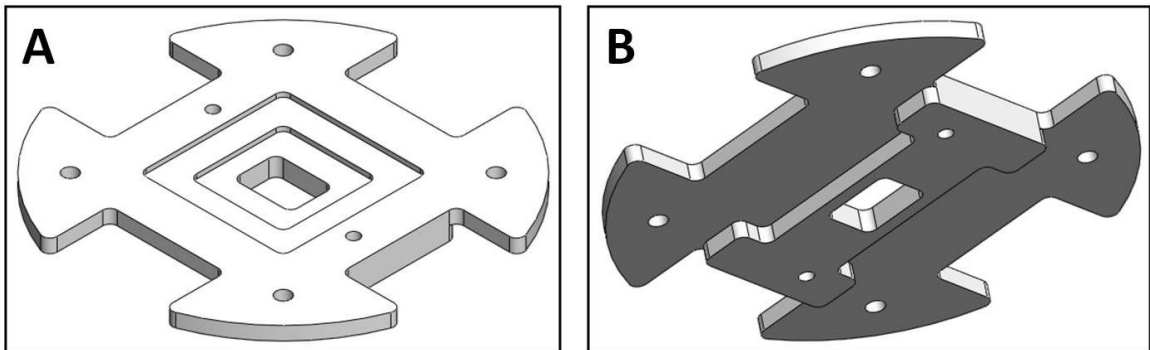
(A) Top plate. (B) Bottom view of top plate.
